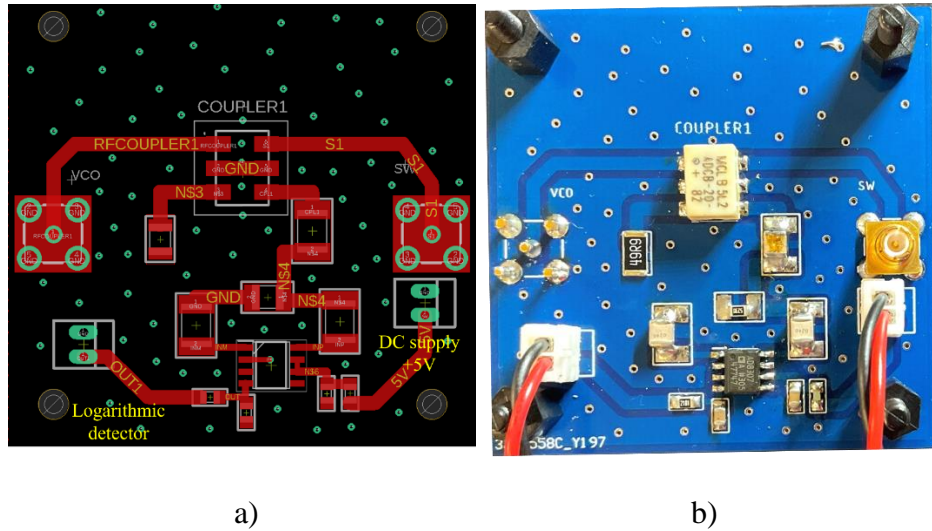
a) Eagle payout of the power measurement module and b) assembled PCB with Bi-Di coupler and power detector
